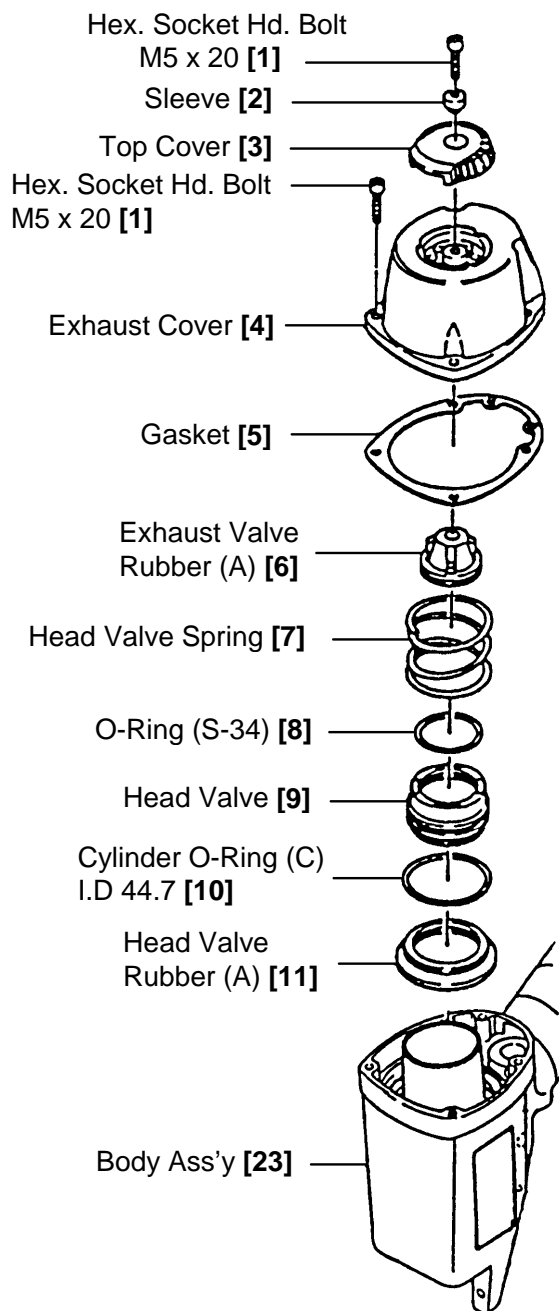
A Disassembly and Reassembly of the Exhaust Cover, Head Valve, Exhaust Valve Rubber (A), etc.
